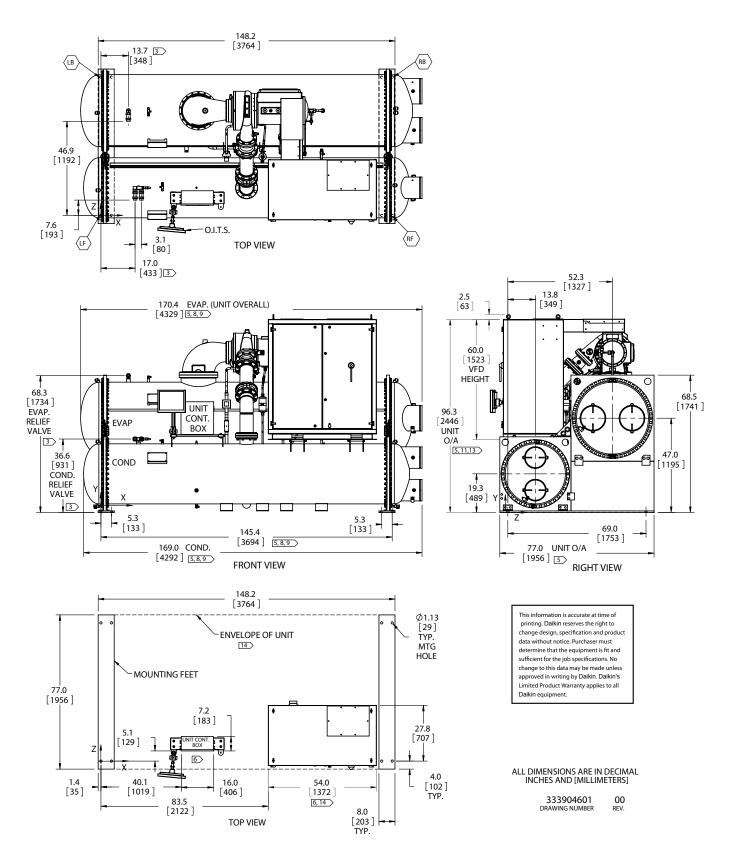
WME0500 - E3012/C2612 -2-pass, M2 Standard Motor (60 Hz 440/460/480V) (See page 16 for drawing notes.)
